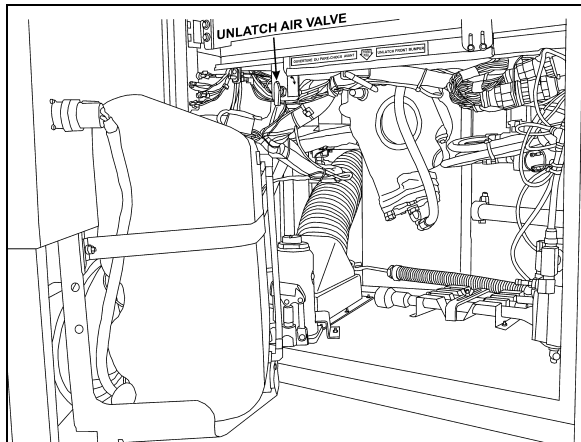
EXTERIOR UNLATCH AIR VALVE 12209
